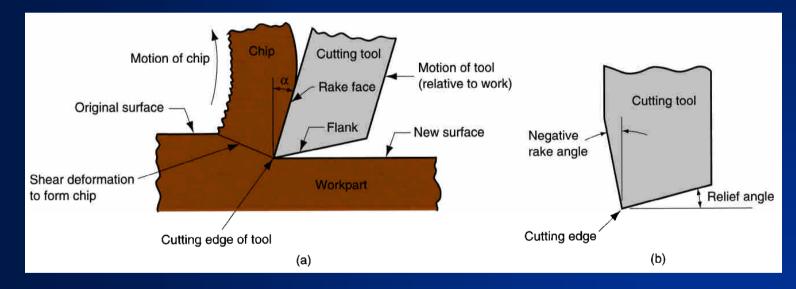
(a) A cross-sectional view of the machining process, (b) tool with negative rake angle; compare with positive rake angle in (a)
